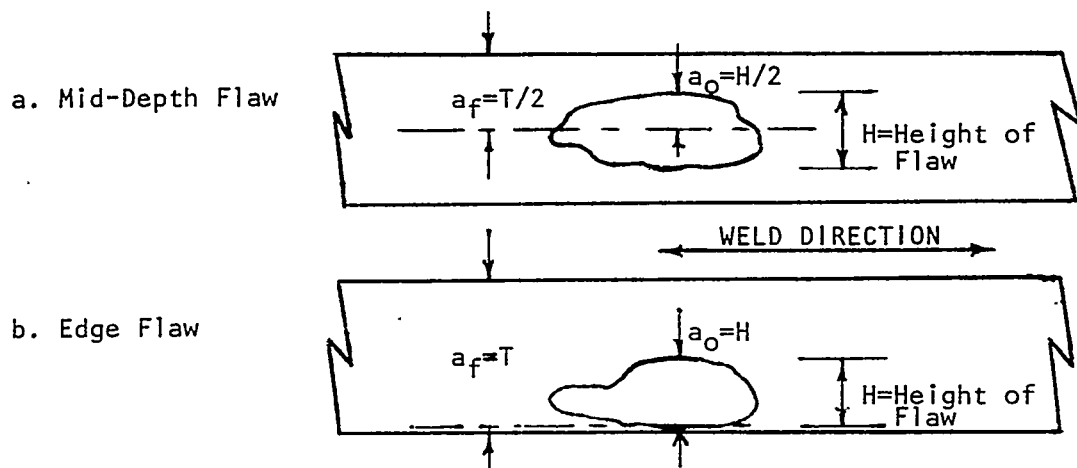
TWO POSSIBLE DEFECT LOCATIONS WITHIN A WELD
